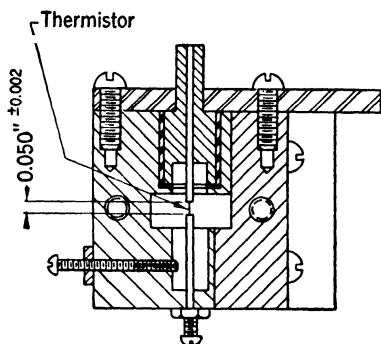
Drawing of a 1-cm-band waveguide thermistor mount.
